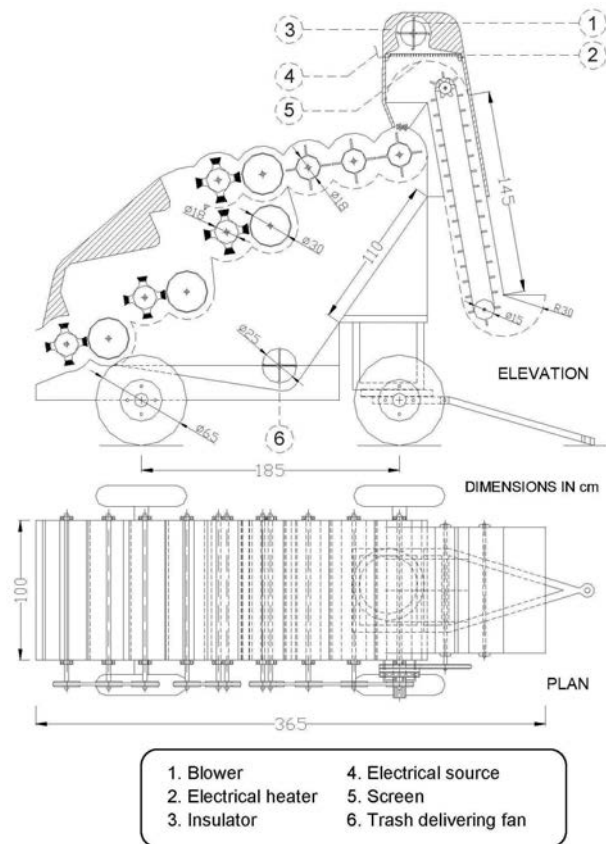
A geometrical drawing of the seed cotton extractor after modification
